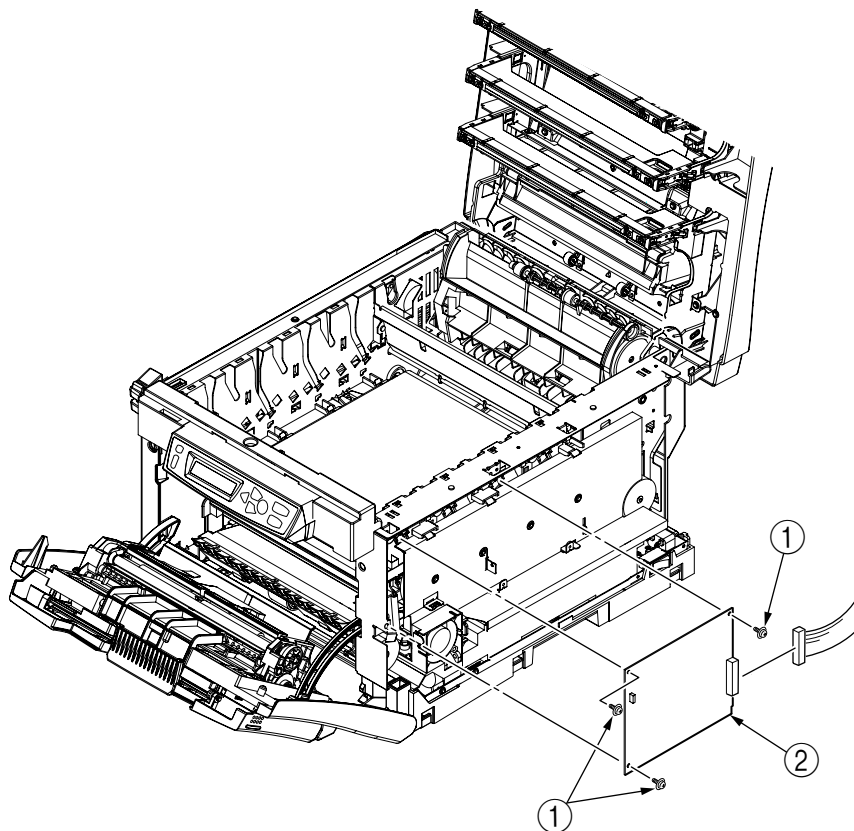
Print Engine Controller PWB (C5100)
